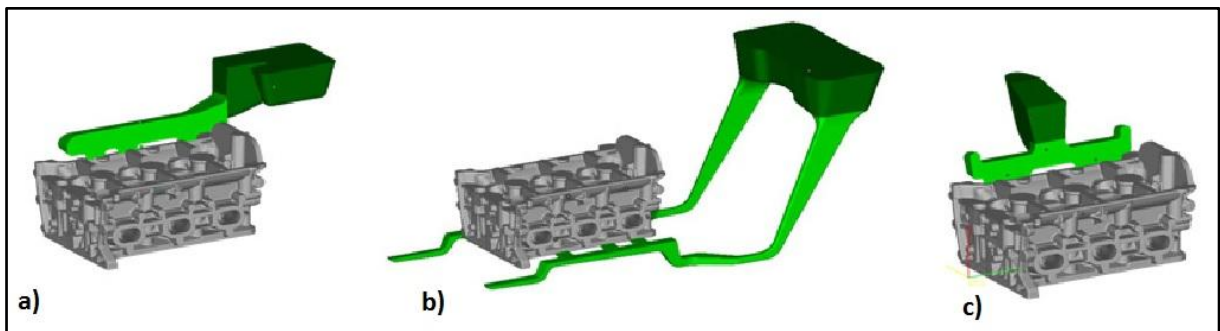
a) Top casting method, b) Bottom casting method, c) Tilt casting method [Pav08]
